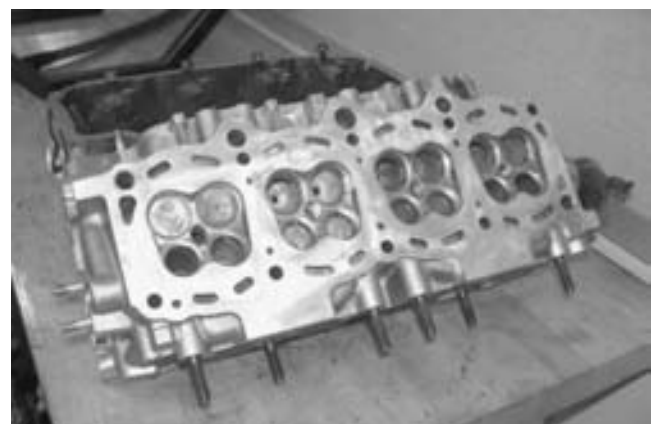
A cylinder head with four valves per cylinder, two intake valves (larger) and two exhaust valves (smaller).
